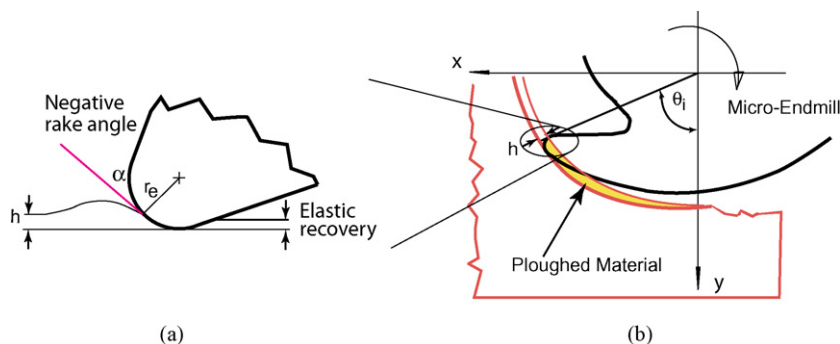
Micro-end milling operations: (a) tool and workpiece and (b) top view.
